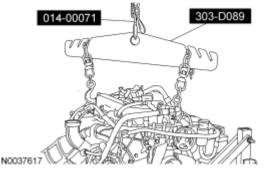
Identifying Special Tools (014-00071, 303-D089) Courtesy of FORD MOTOR CO.
